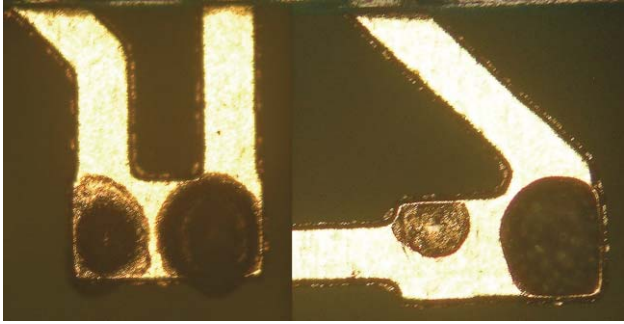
Photograph showing stencil printing of the ICA-B (left) and ICA-A (right) for the boards used for shear tests.
